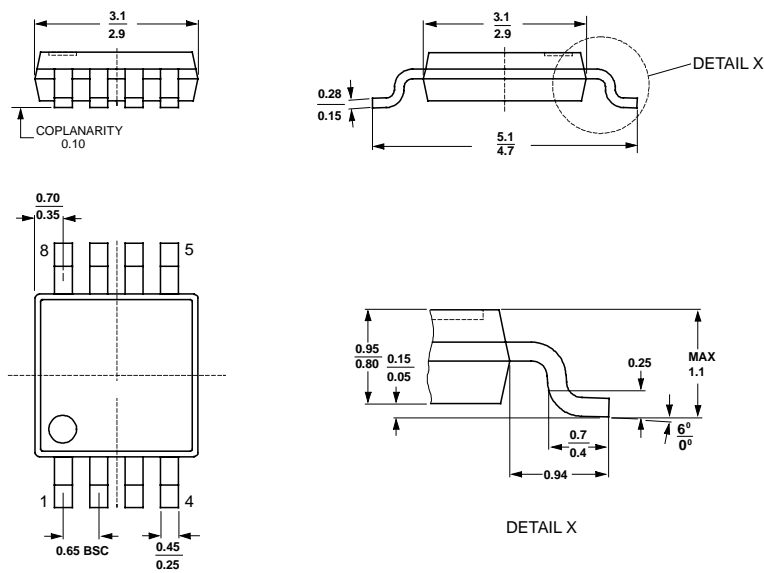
8-Lead MSOP Package Dimensions shown in millimeters
